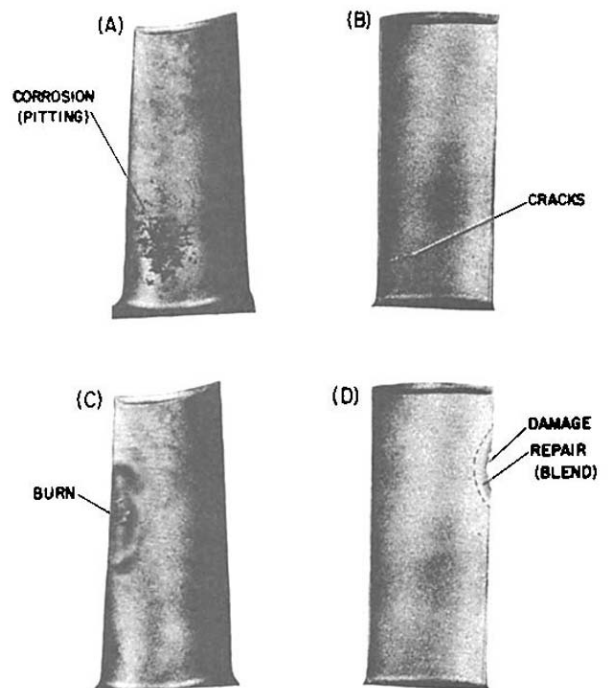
(A) Blade showing corrosion (pitting); (B) blade showing cracks; (C) blade showing burn; (D) blade showing damage and repair (blend).
